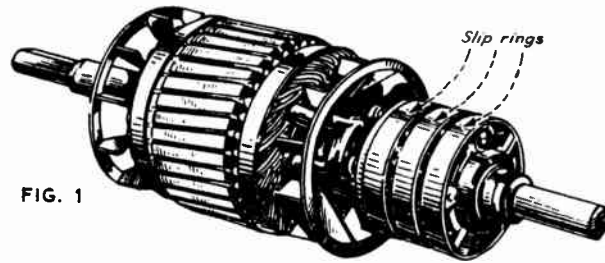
Rotor for a wound-rotor or slip-ring motor. Fig. 2—Diagram of wound-rotor motor and its starting resistance. Fig. 3—Combination of a squirrel-cage and a coil winding on rotor, for automatic starting.
